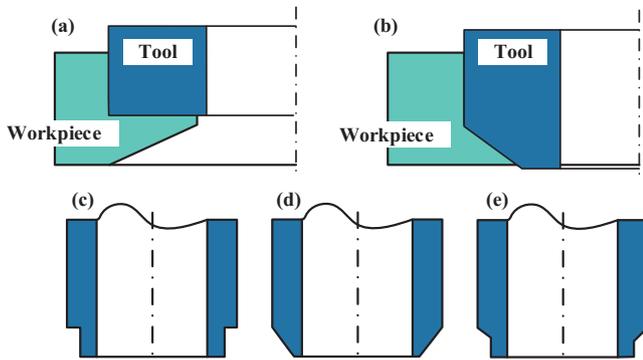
Design of special-shaped and low-damage tool [65–68].
